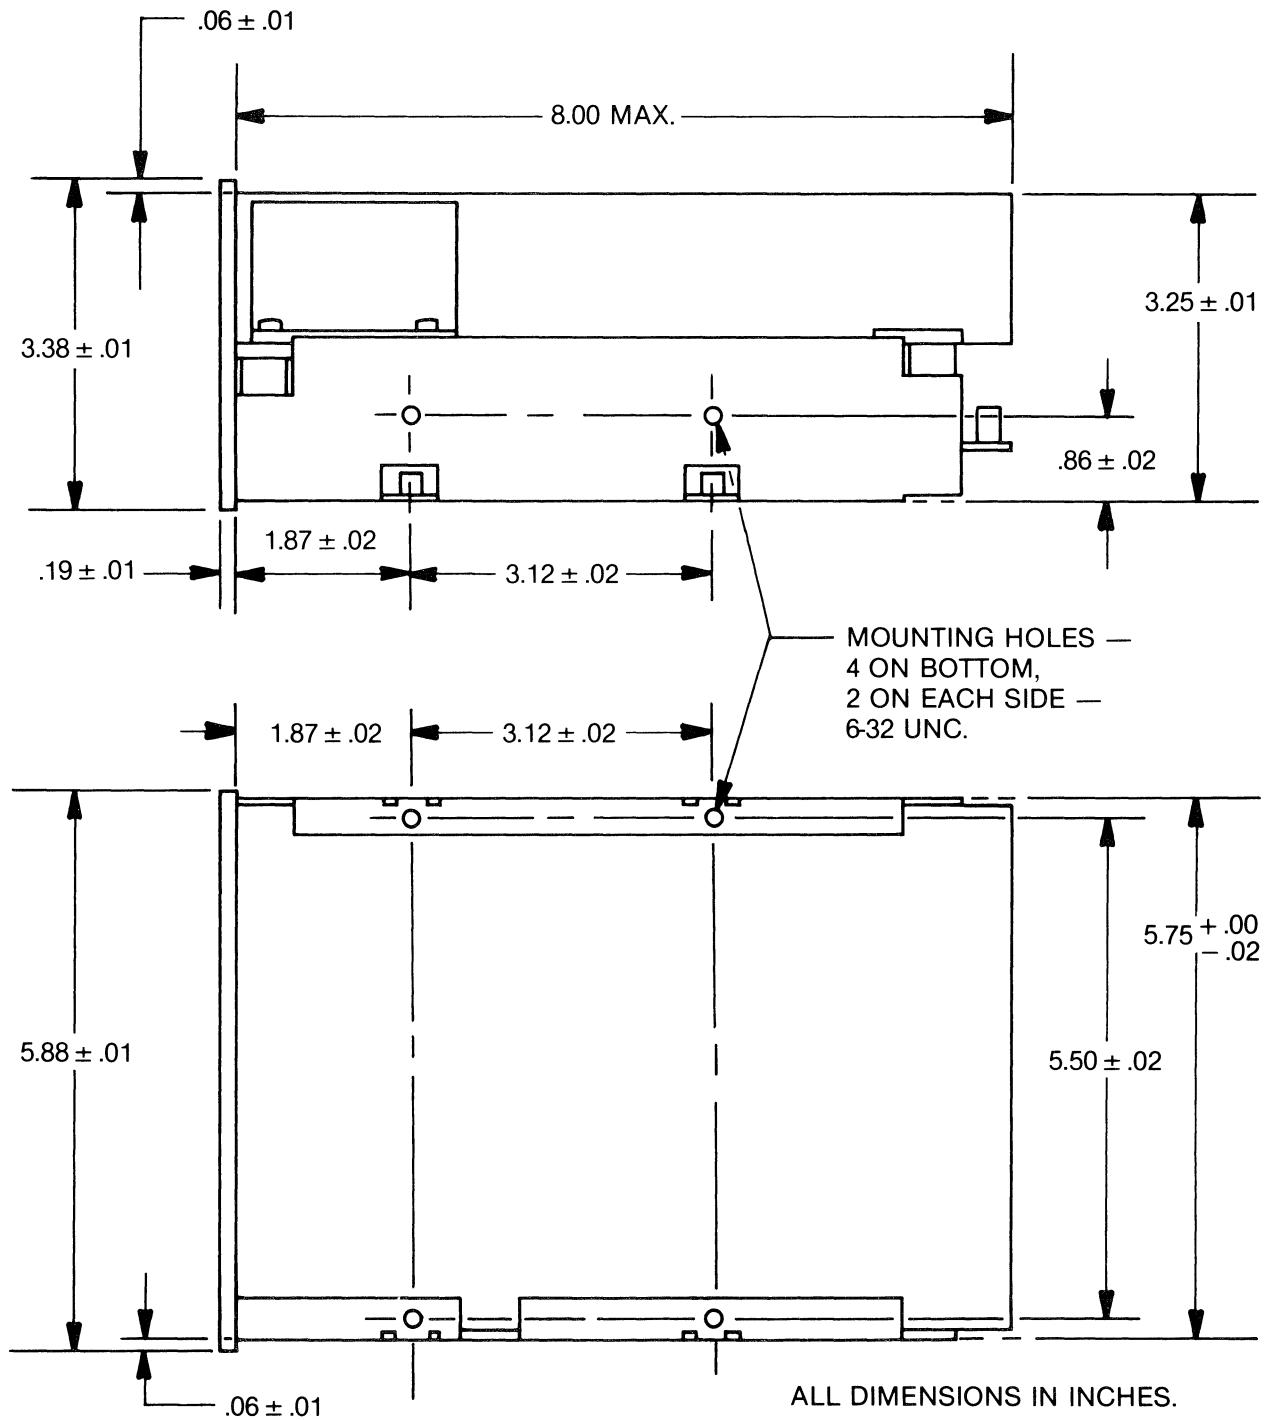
CM5000 MECHANICAL OUTLINE
